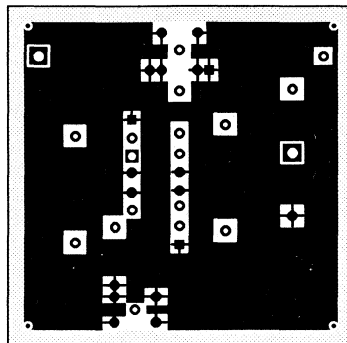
Component Side (Top) Showing Extensive Ground Plane
